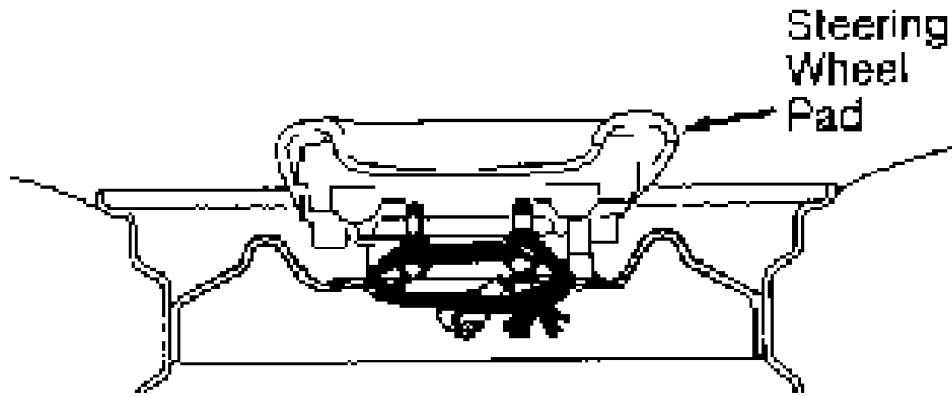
Installing Steering Wheel Pad On Wheel Assembly
